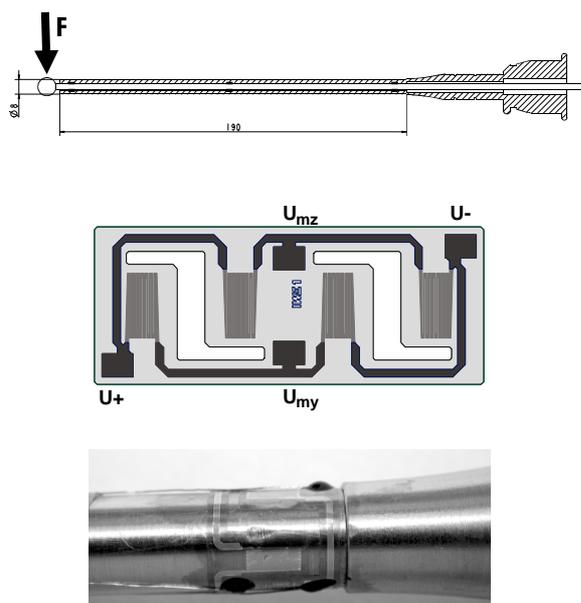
Milling tool, sensor foil and sensor foil wrapped around the shaft of the milling tool
